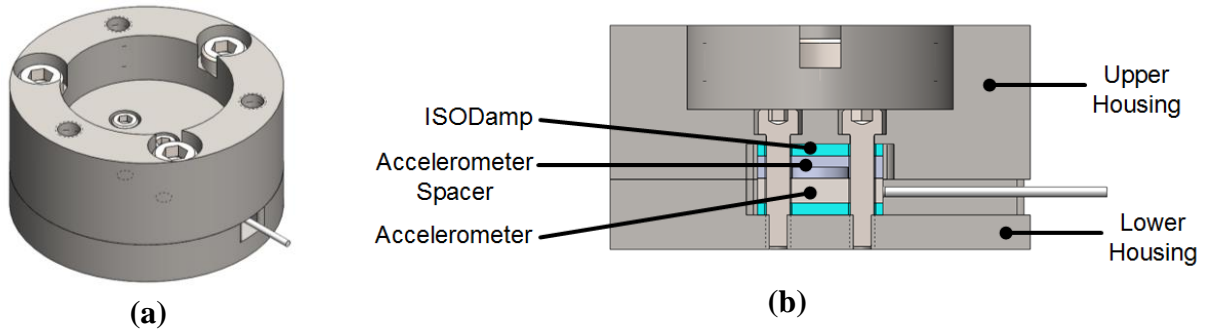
Isometric (a) and Section (b) Views of Mini BOB
